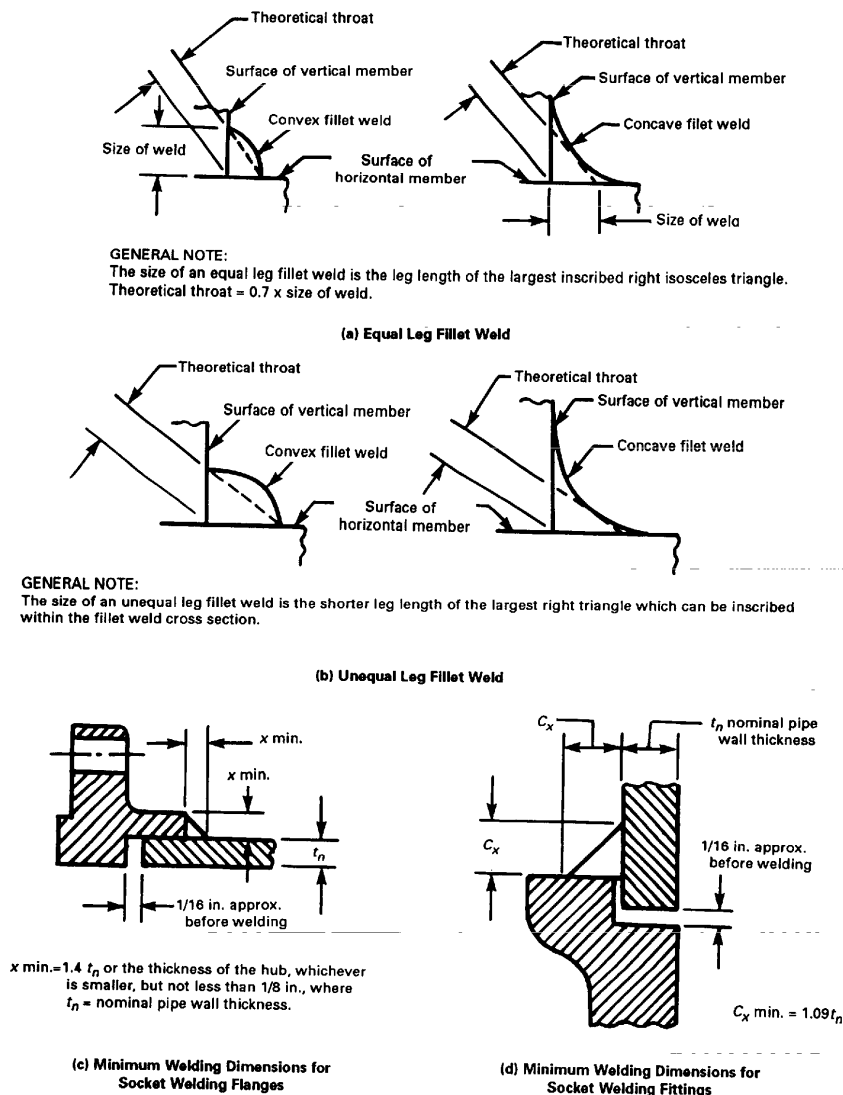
FILLET AND SOCKET WELD DETAILS AND DIMENSIONS
